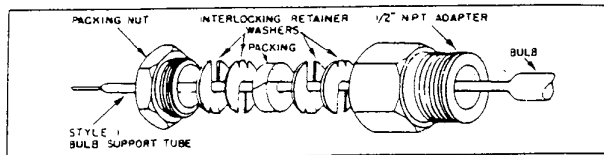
Part No. FTG13A-600 packing nut assembly. (Used with swaged bulb with support tube for direct immersion application.)
